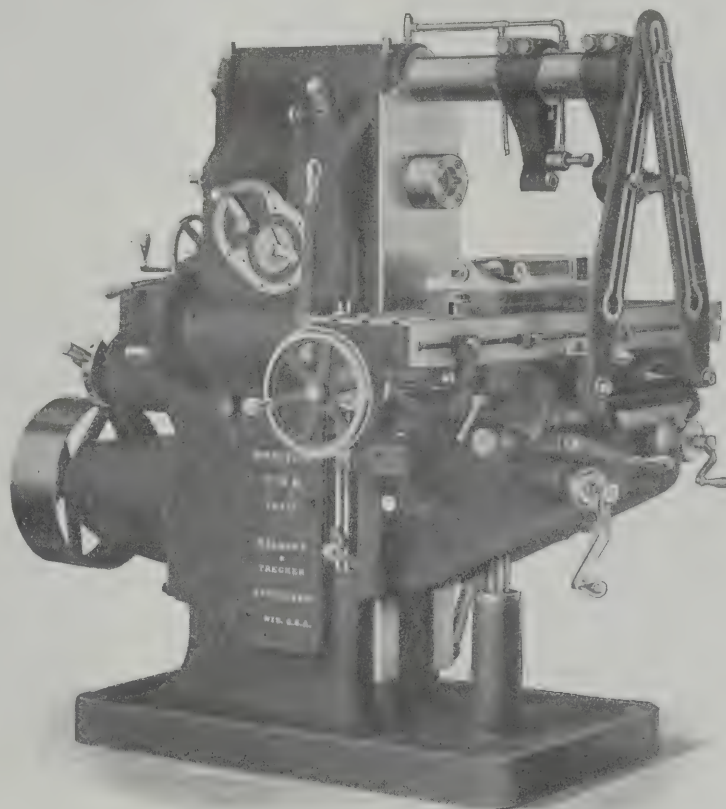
Milwaukee No. 2B Plain Milling Machine, with Geared Drive and Feed
